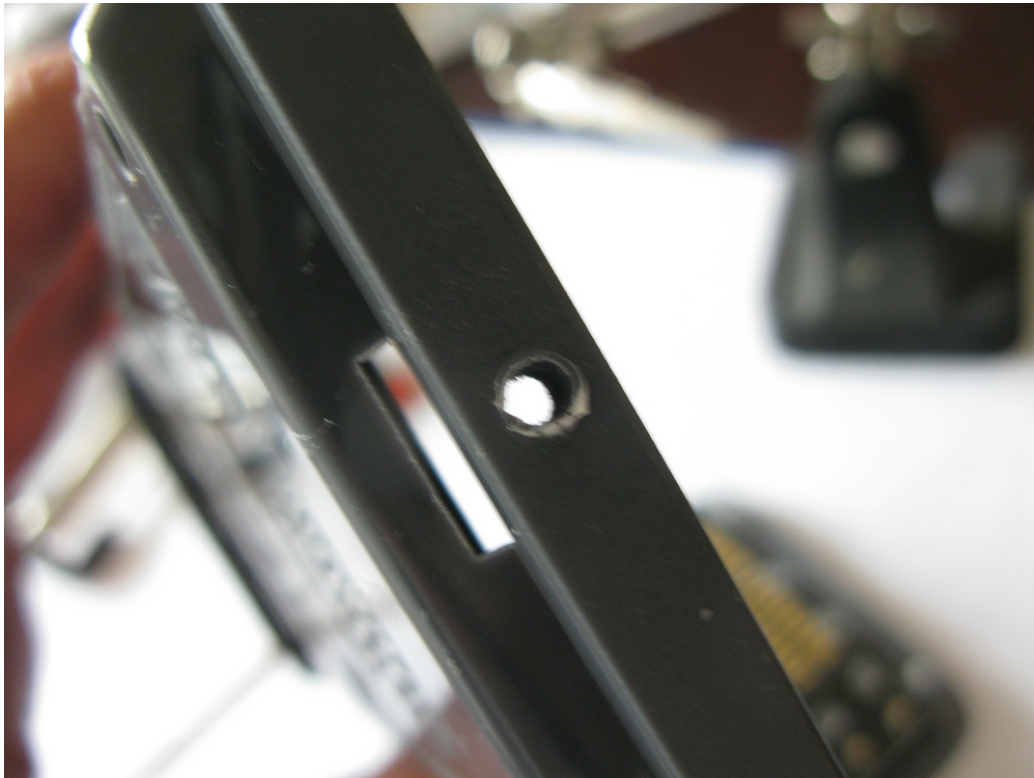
This is the hole I melted with the soldering iron into the top side of the back case - not the back cover. You can also drill the hole.
